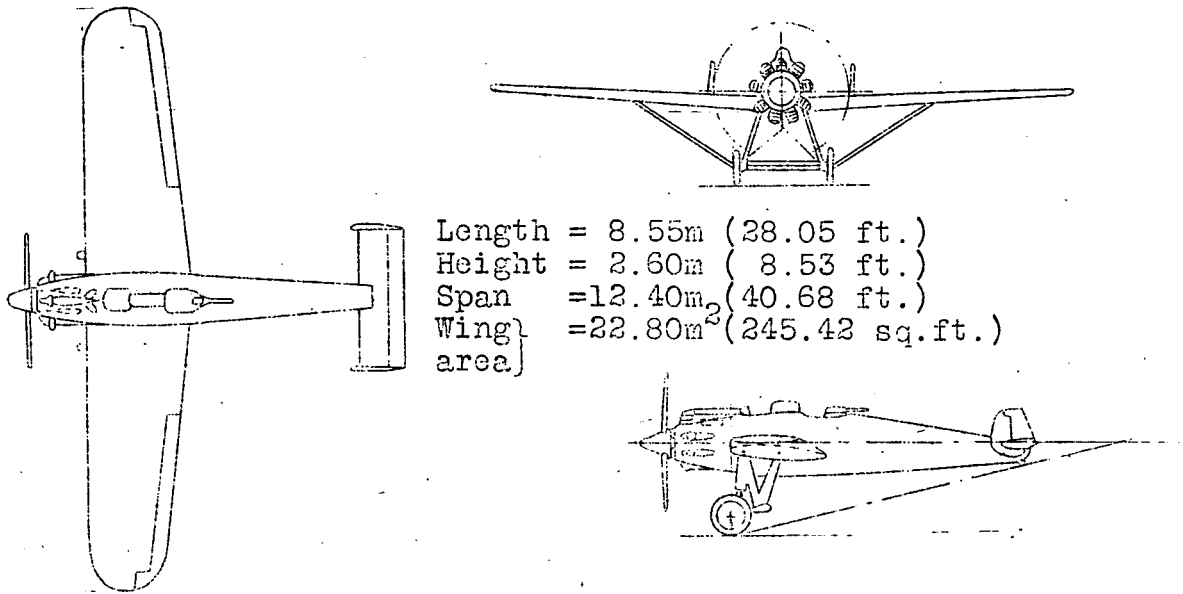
Elevations and plan of the K 47 pursuit airplane.
